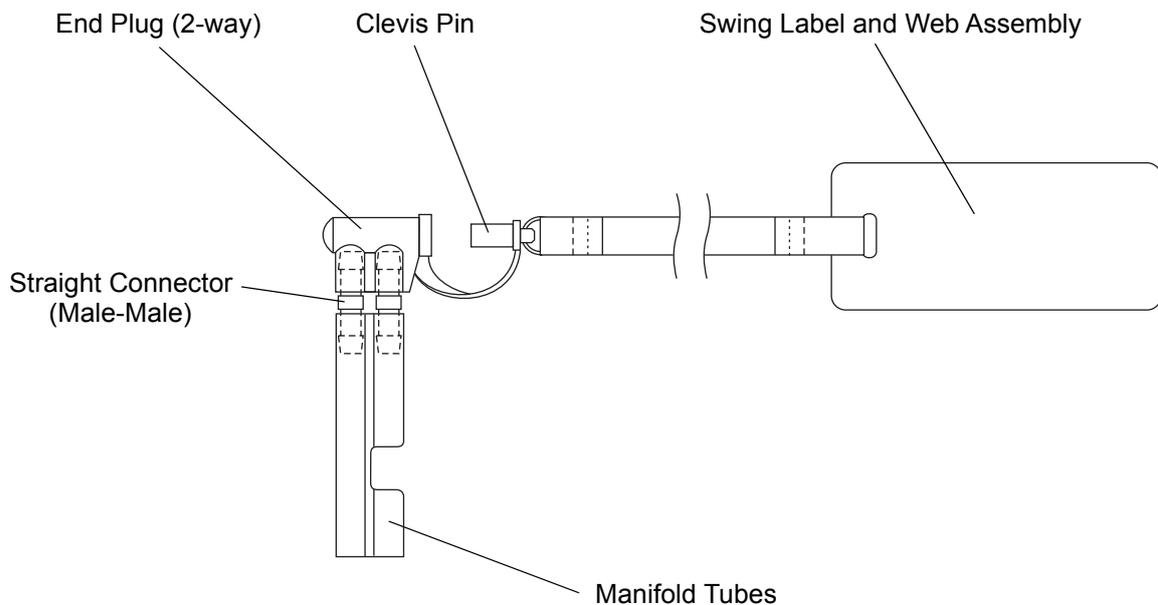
CPR/Rapid Deflate End Plug Assembly
